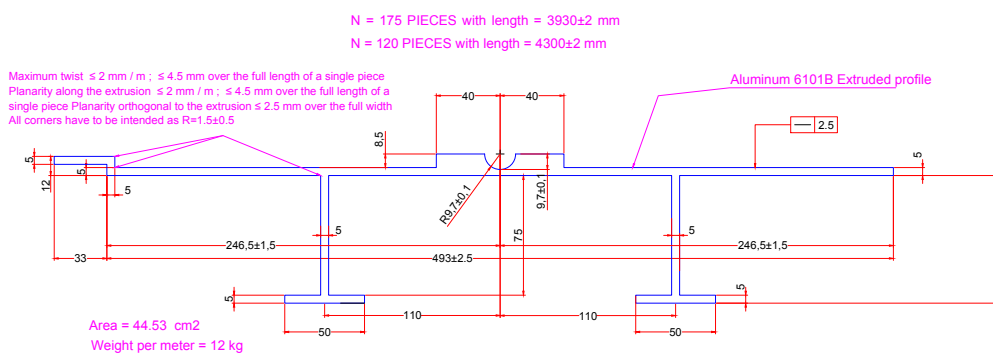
Technical drawing of the aluminum panels cross-section used for the extrusion.
